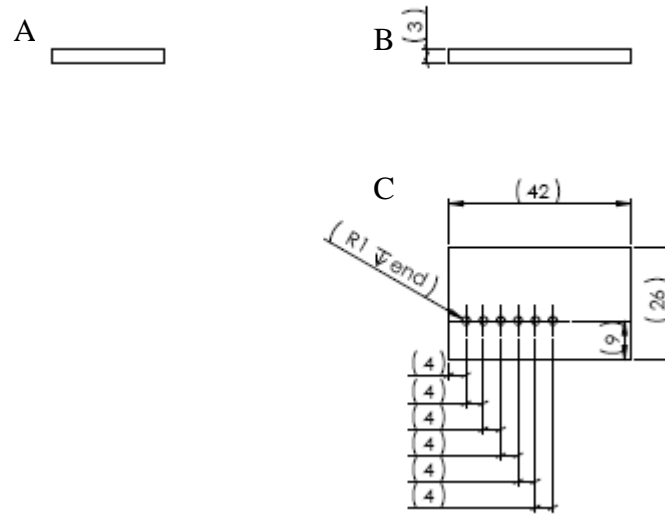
An acrylic box no.1 drawing in mm scale, (A) side view, (B) front view and (C) top view.
